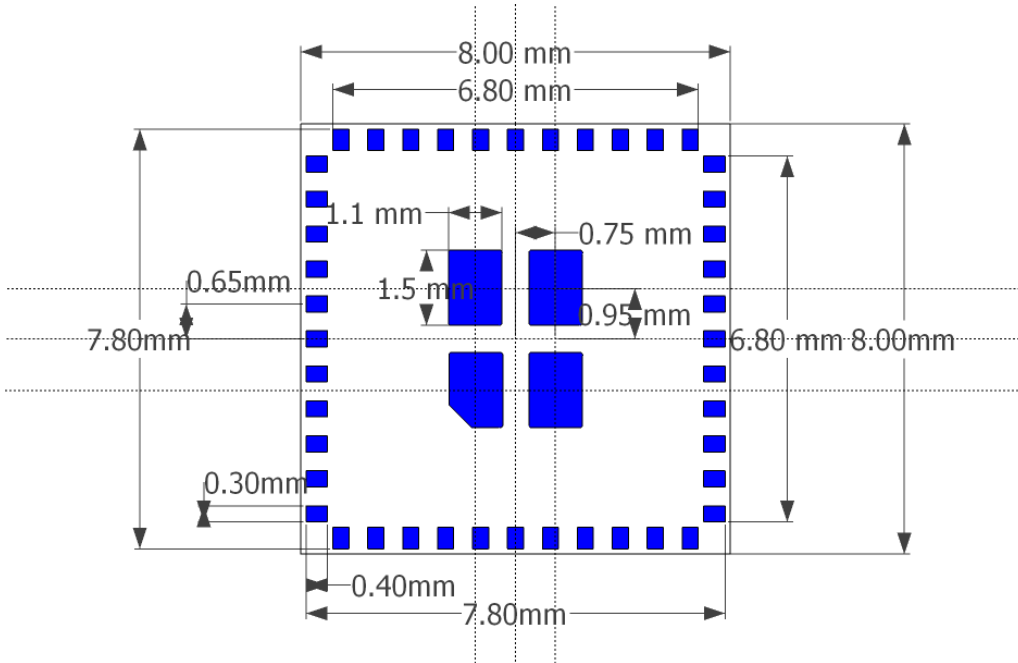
HDG205 Pad pattern, top view, units in mm
